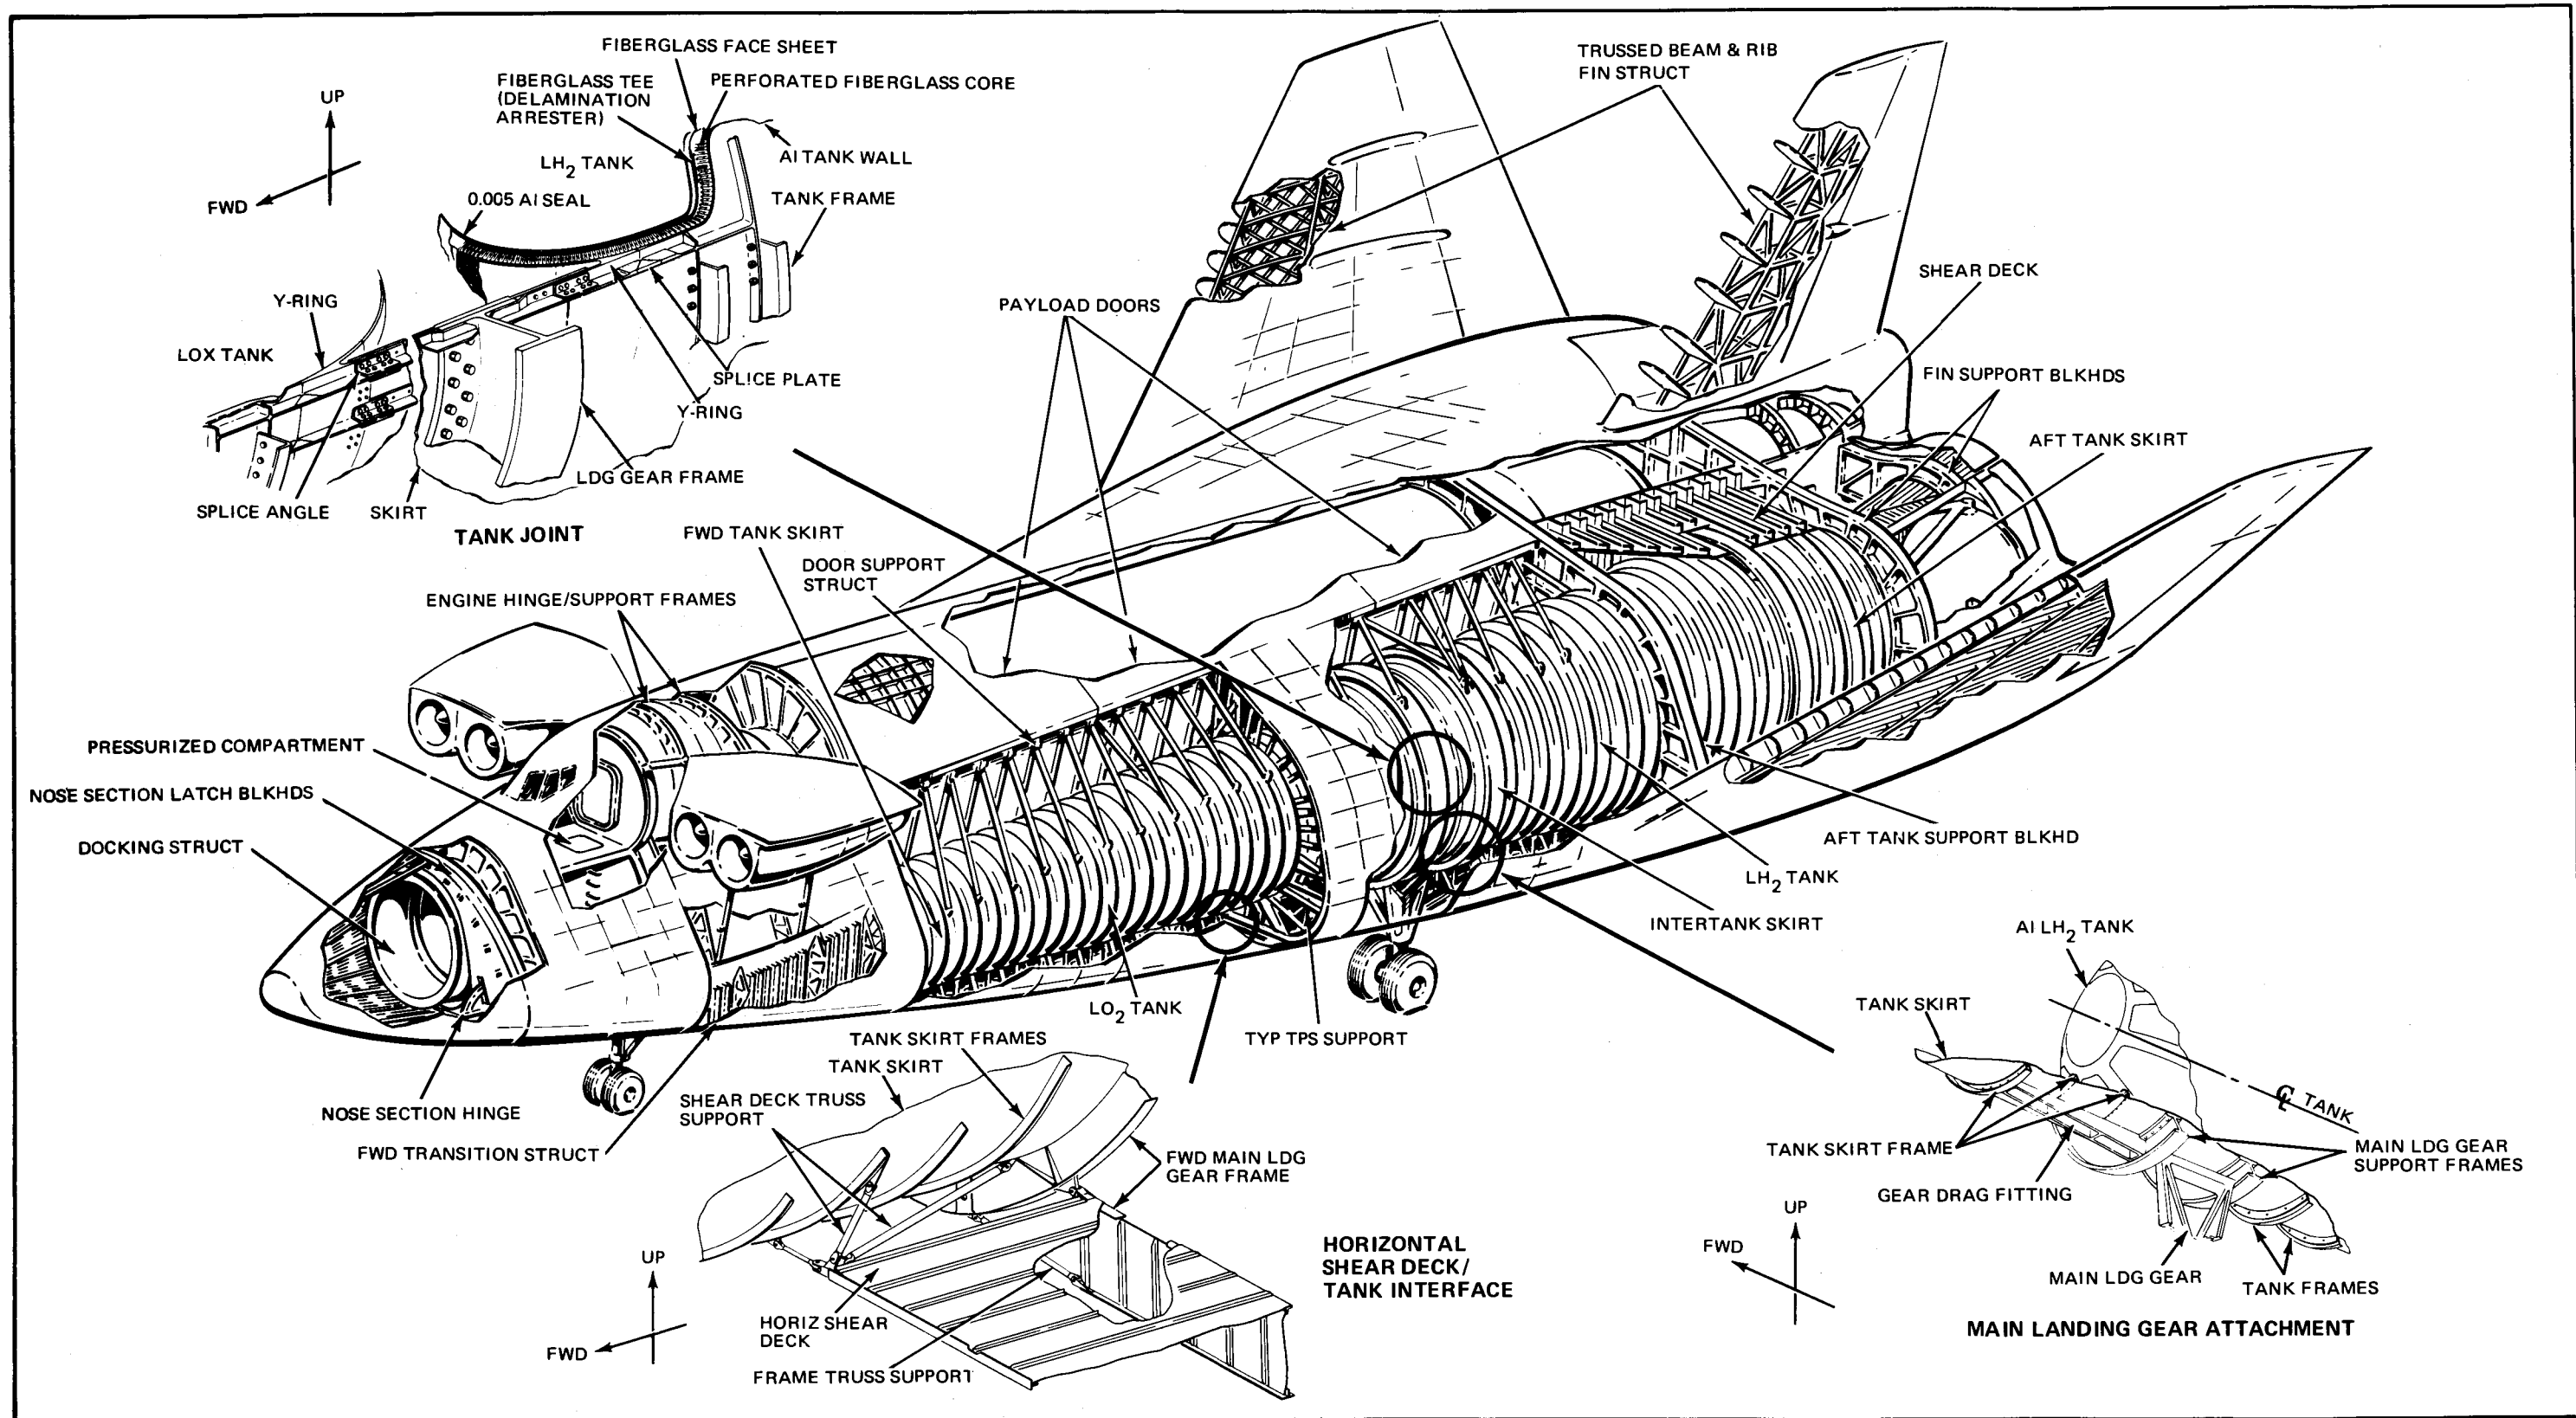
Design 518 Orbiter Structural Arrangement
